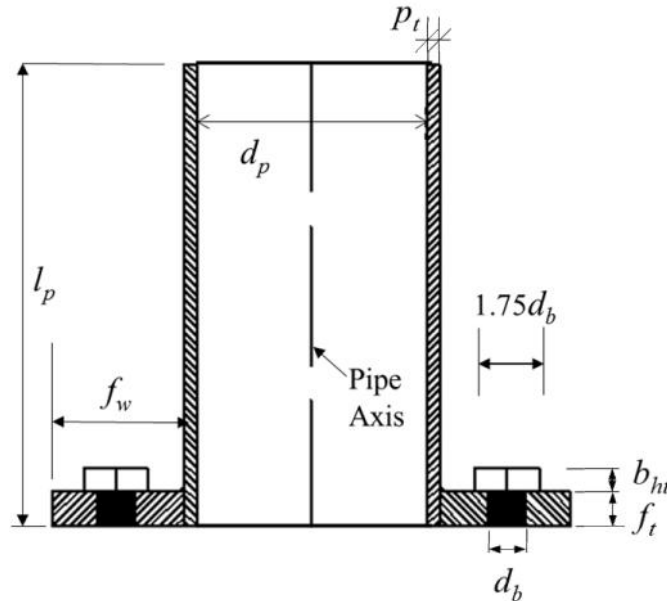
Elevation of the upper part of the pipe joint with necessary dimensions
